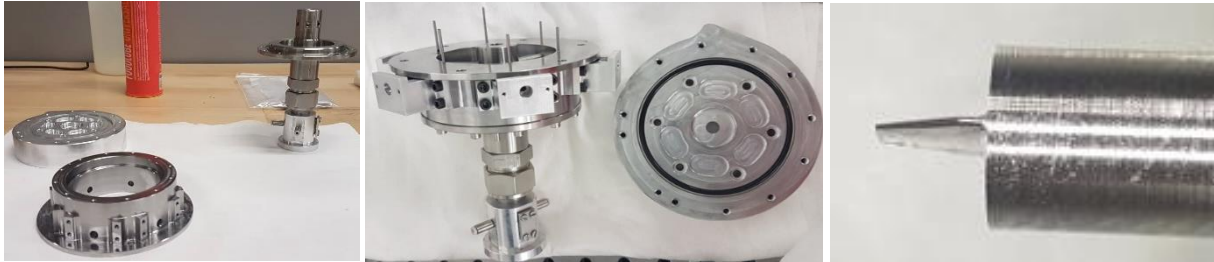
Constituent parts of the new mechanism: Clean parts after ultrasound (left), calibrators mounted on the mechanism (center) and magnified image of an IGV (right)
